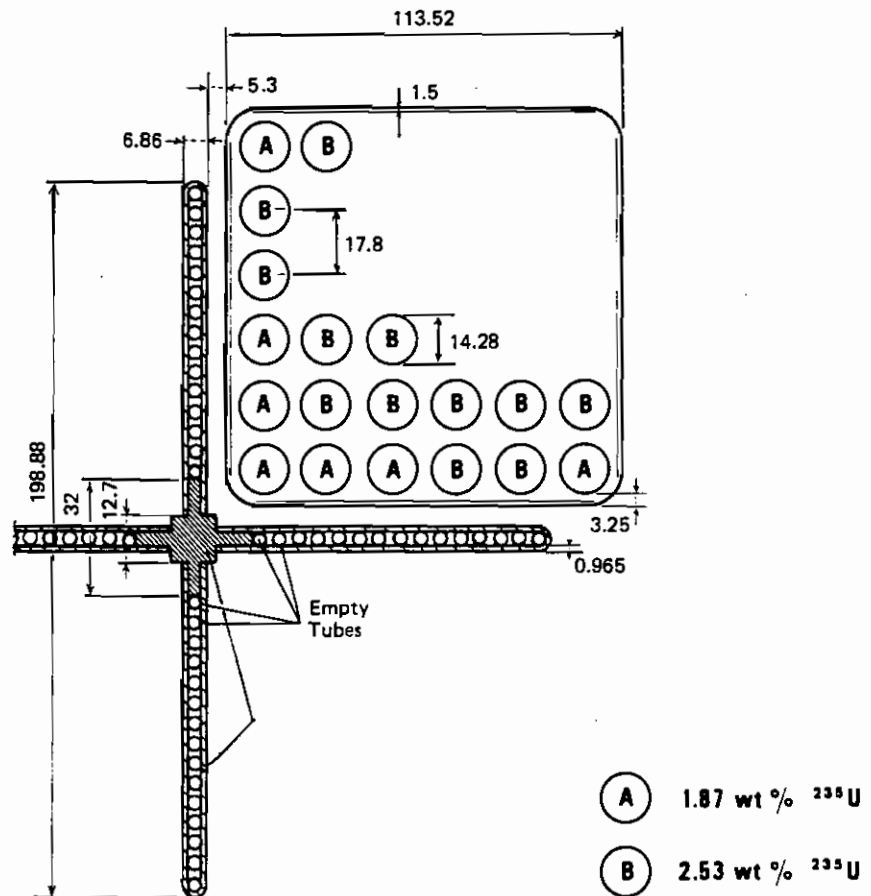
Cross section of the Gundremmingen assembly (All dimensions are given in mm)
